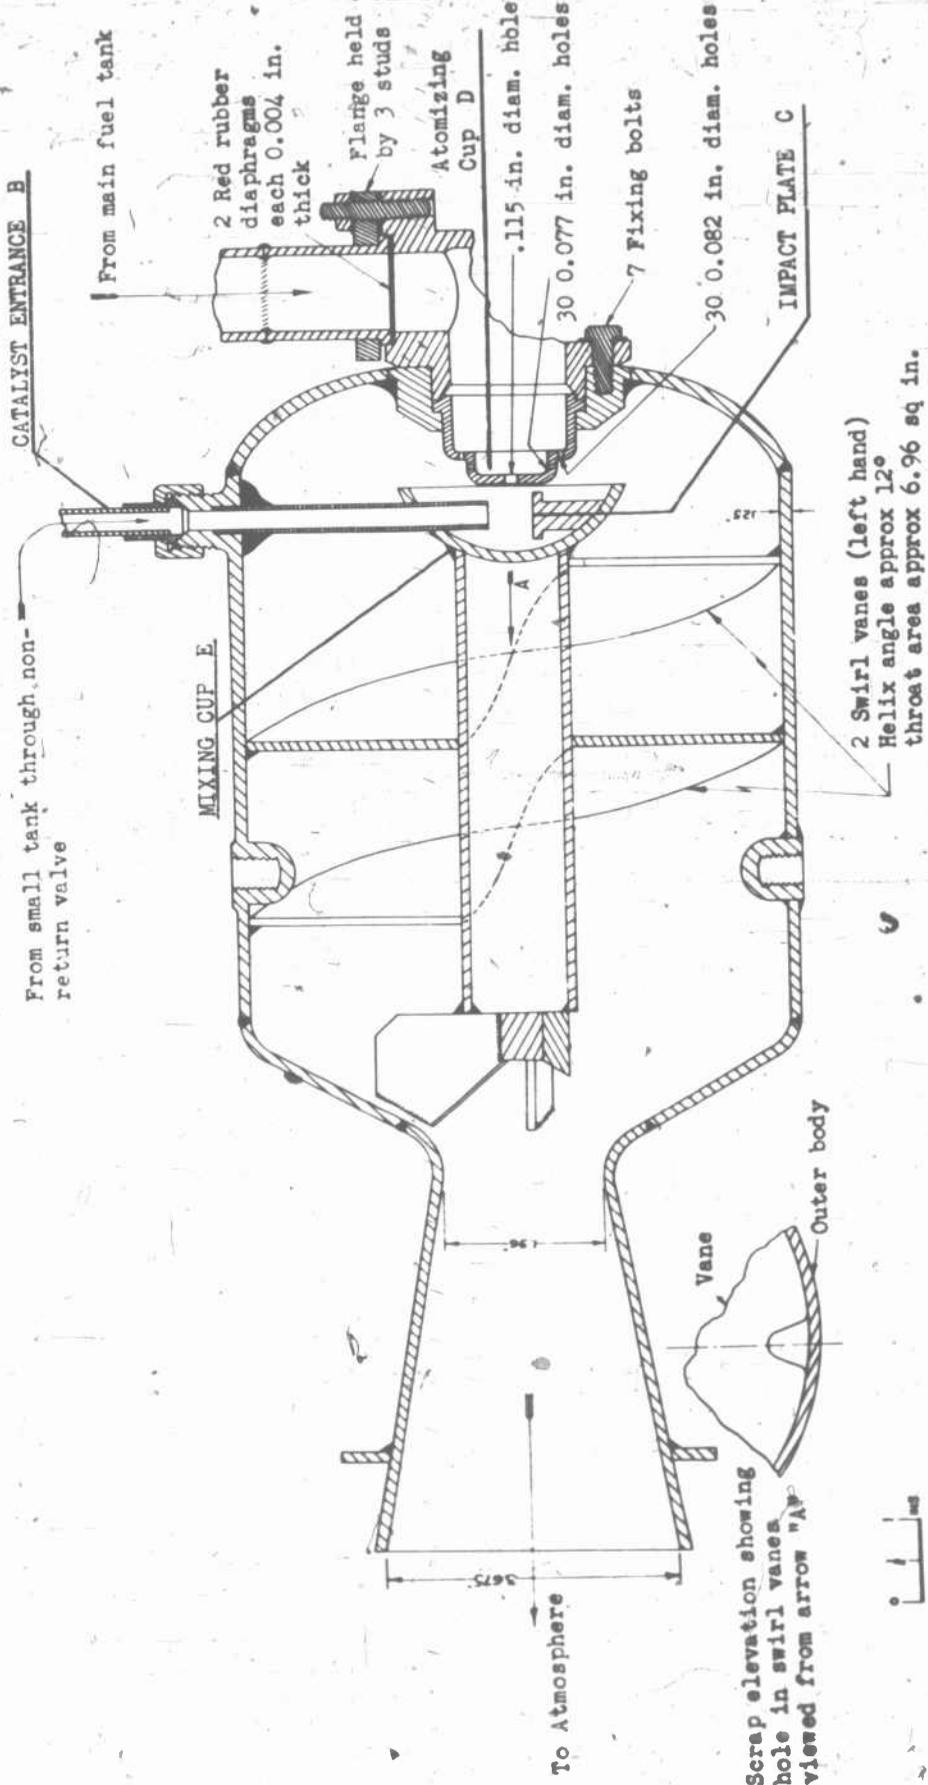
Detail of HWK 109-507 Combustion Chamber With Injector
